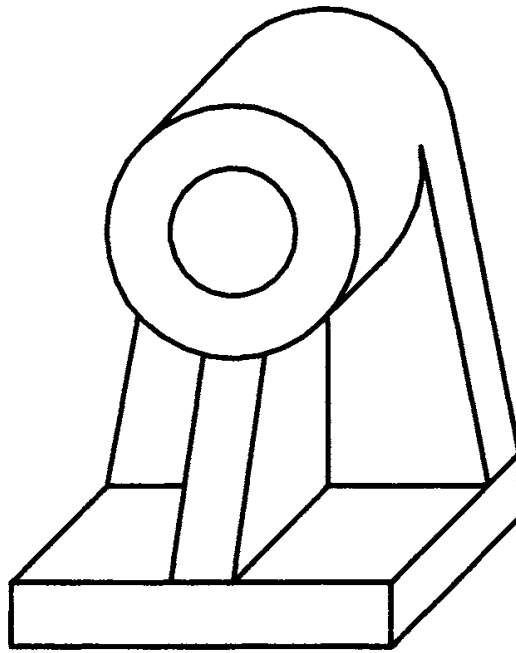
Example of the method of drawing an oblique projection bearing bracket
